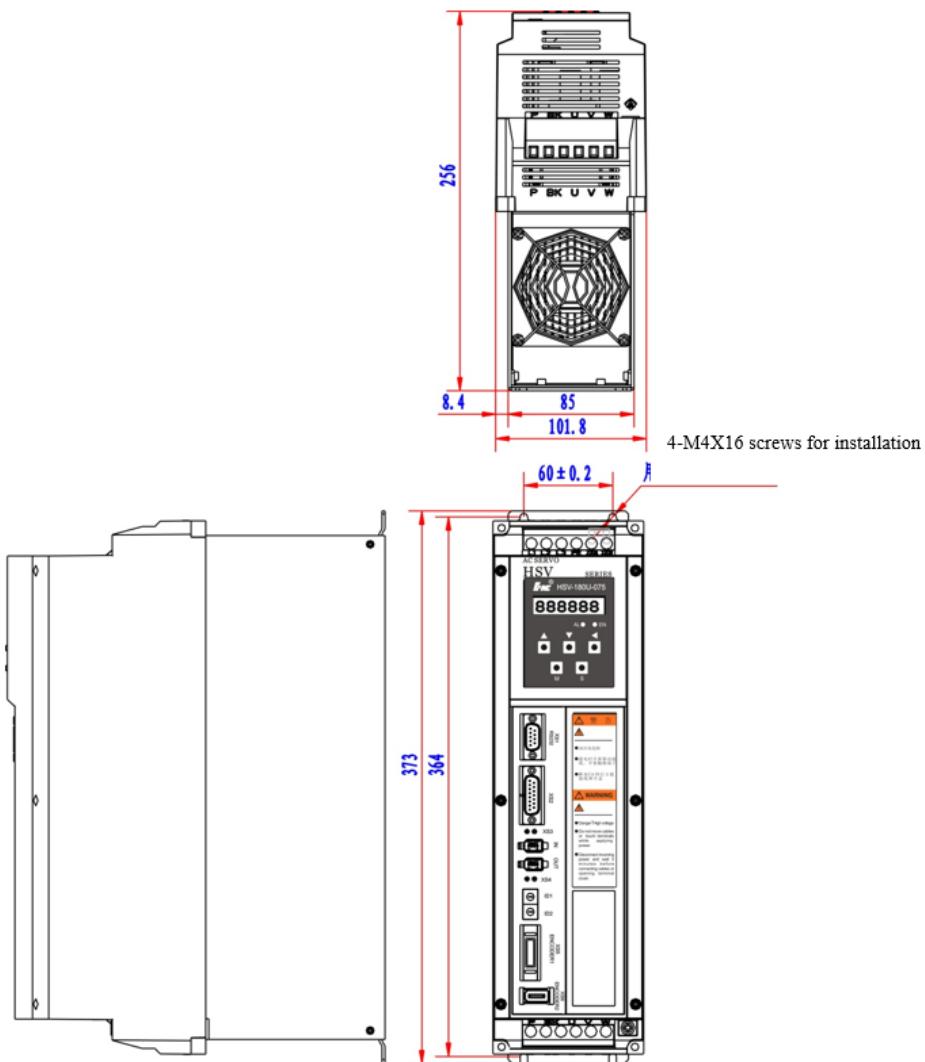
Dimensions of HSV-180US-035, 050, 075 Spindle Drivers (unit: mm)
